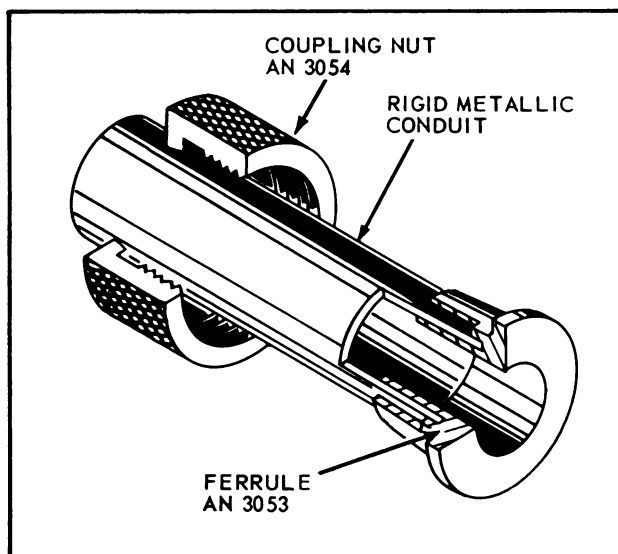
Installing Nut & Ferrule on Rigid Metallic Conduit
